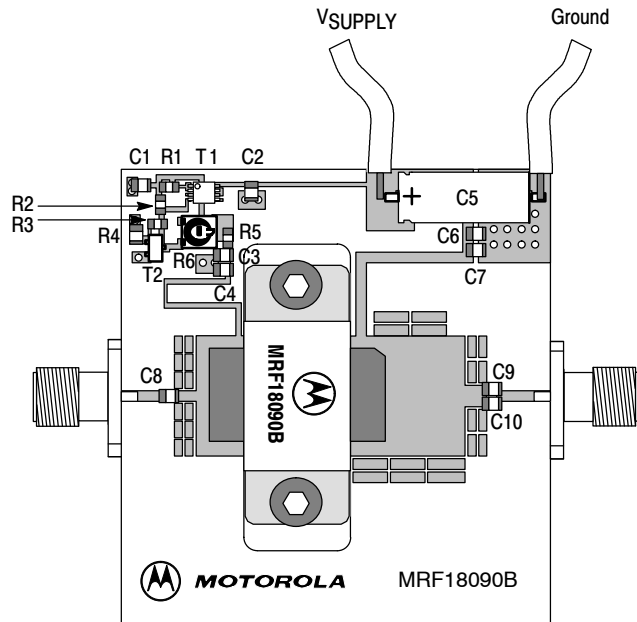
1.93 - 1.99 GHz Demo Board Component Layout
